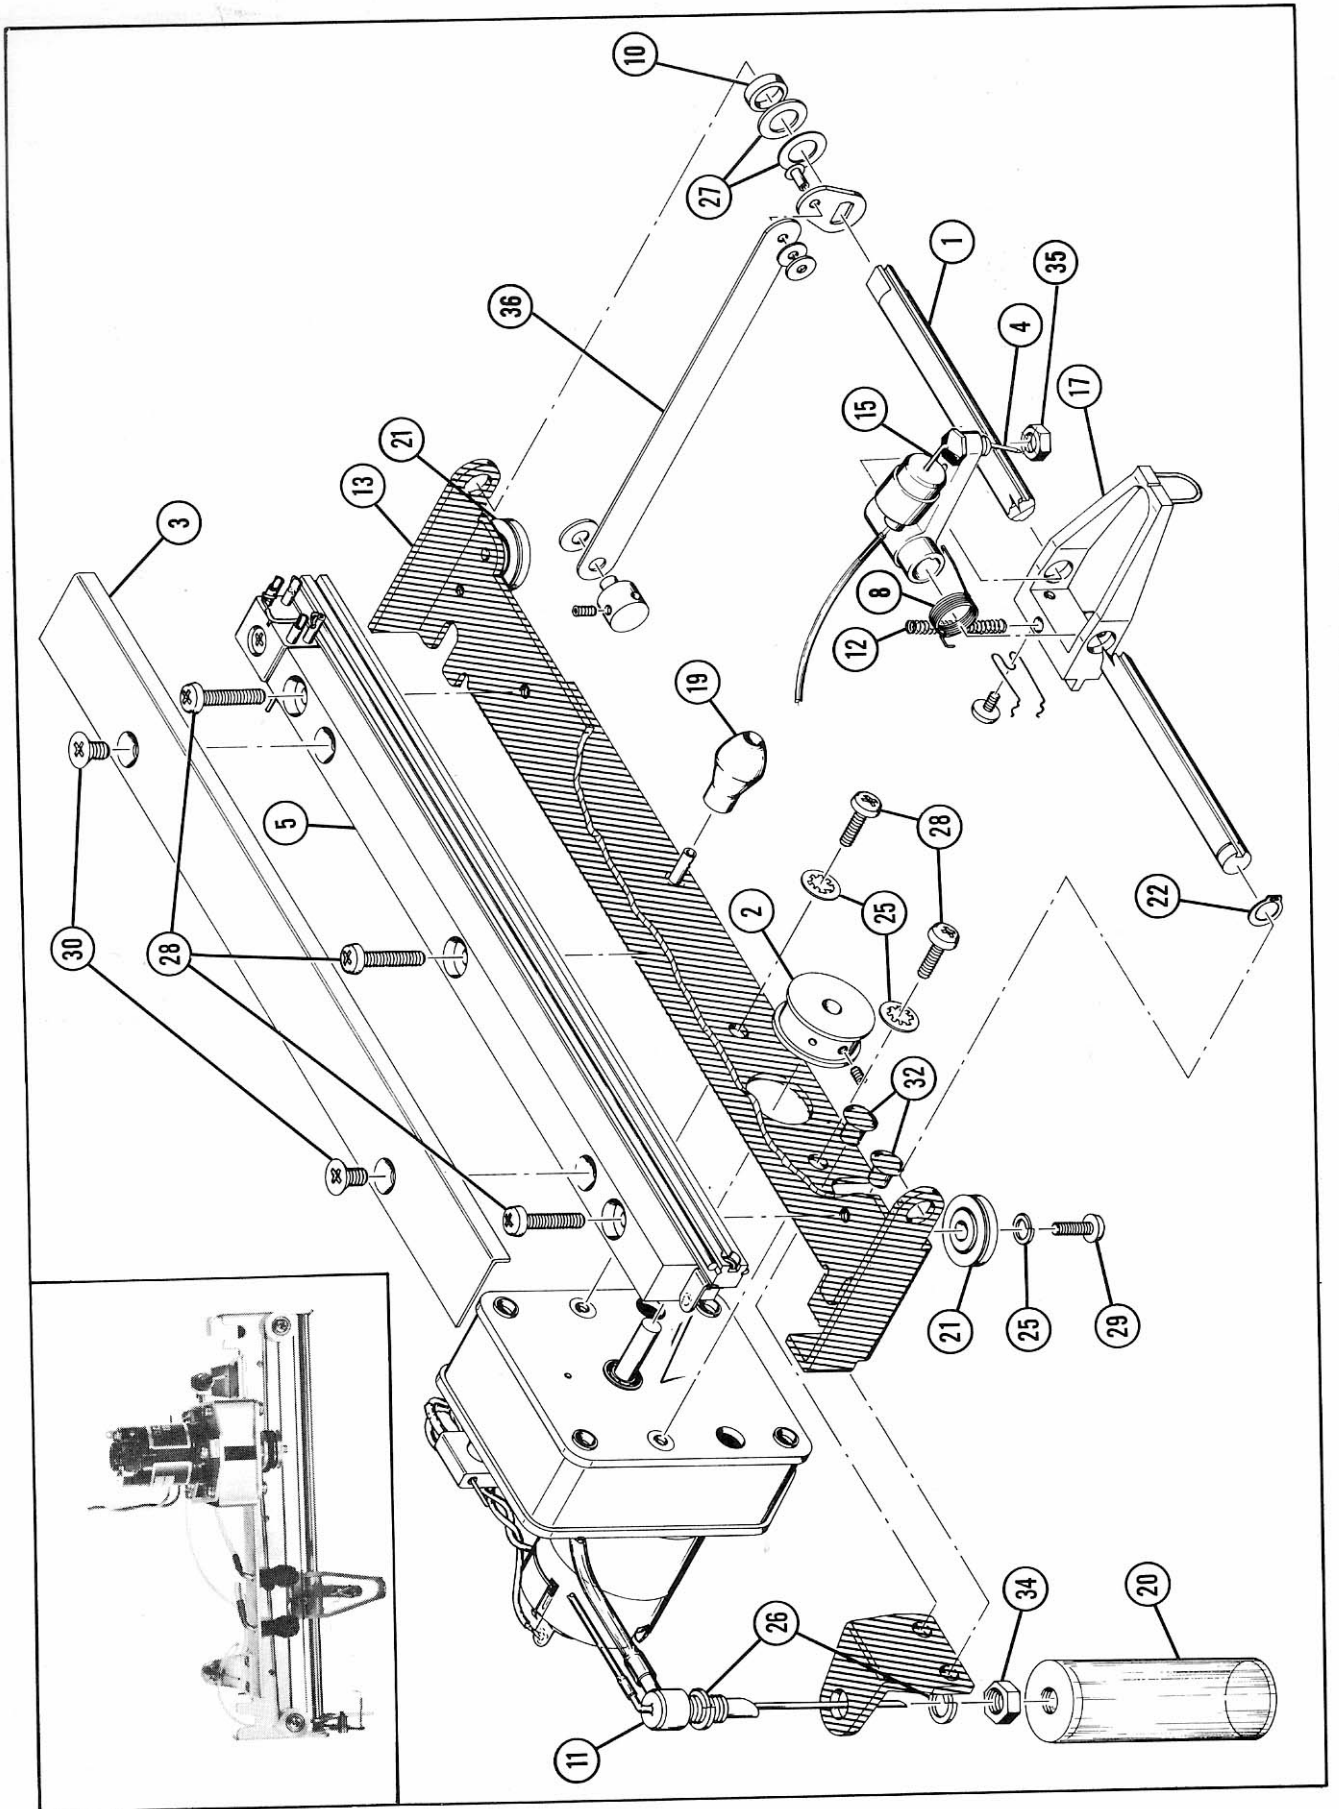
EXPLODED VIEW OF PEN CARRIAGE (Sheet 1 of 2)
